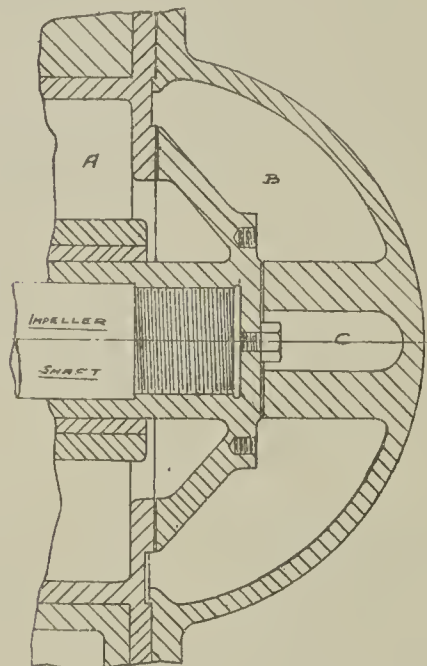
BALANCING DISC, MATHER AND PLATT PUMP.
